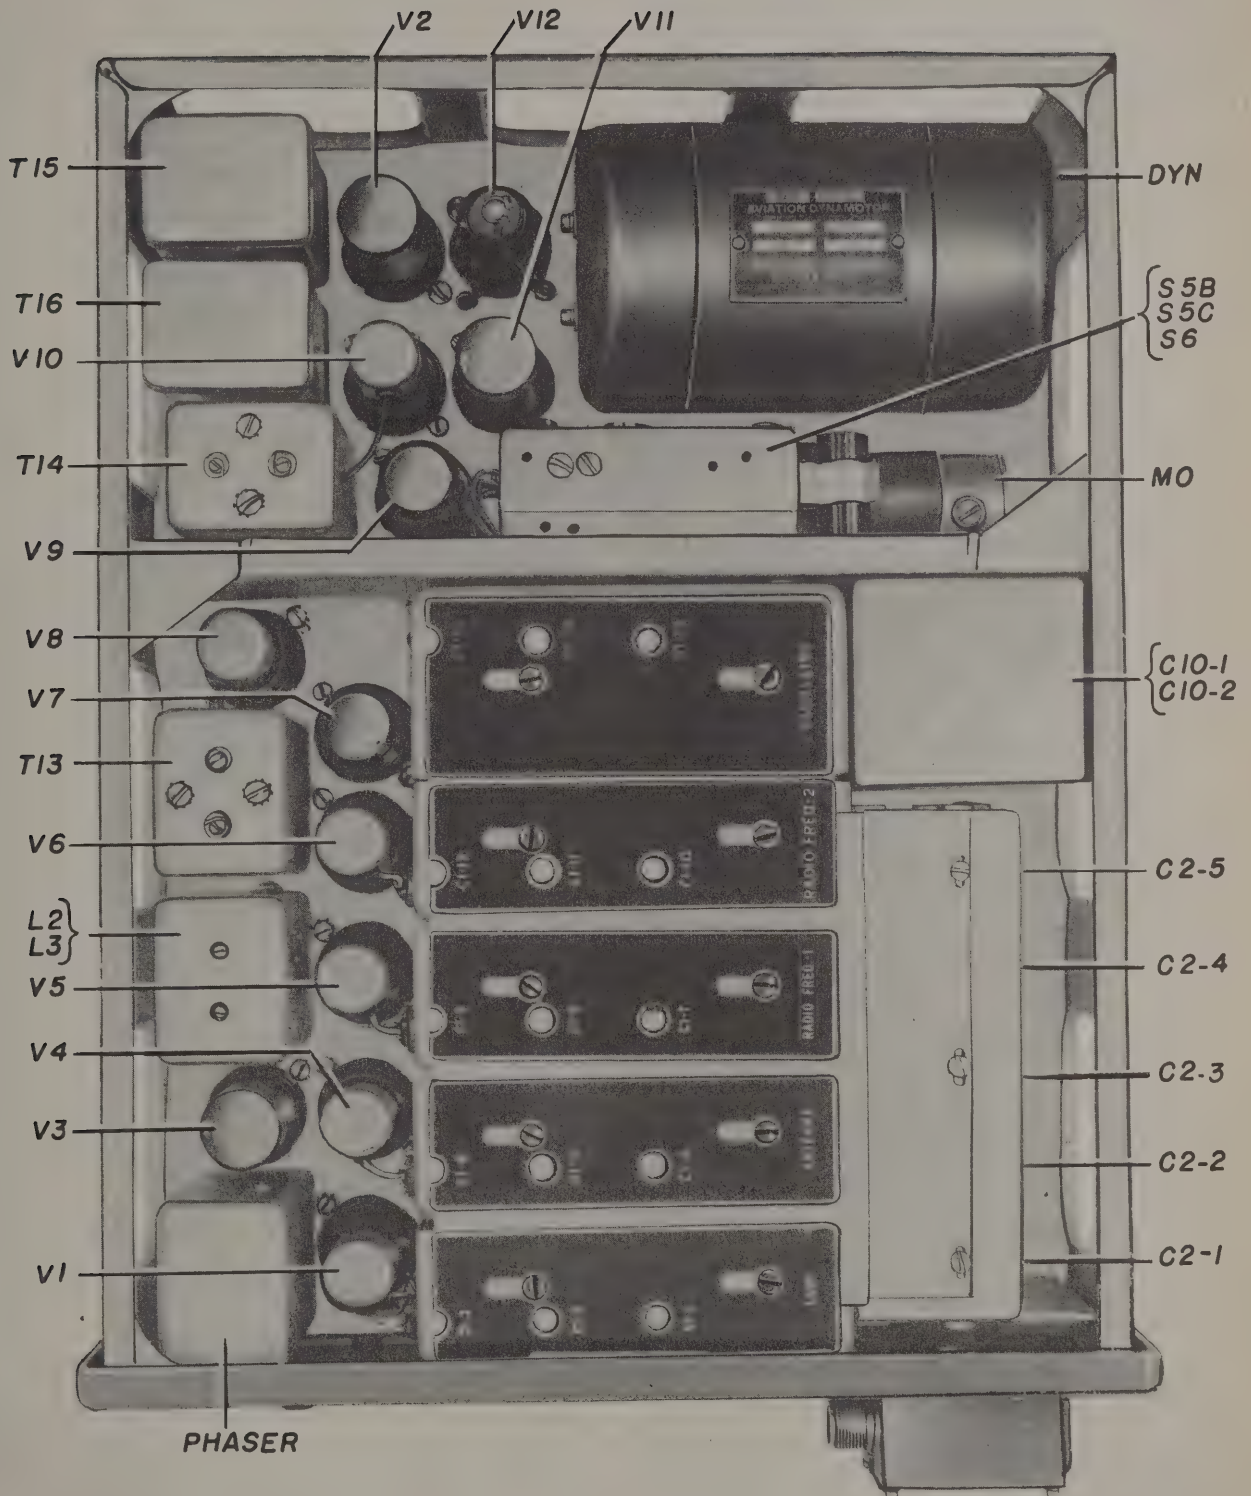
Type MN-26* Radio Compass, Top of Chassis
